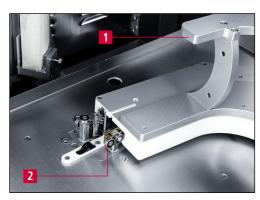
Move the SP112 Copy grinding plate onto the guide carriage
